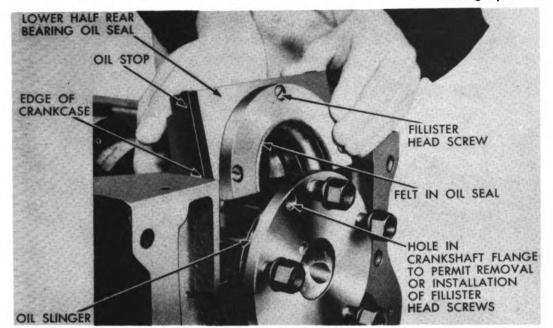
Installing Lower Half Rear Bearing Oil Seal.
